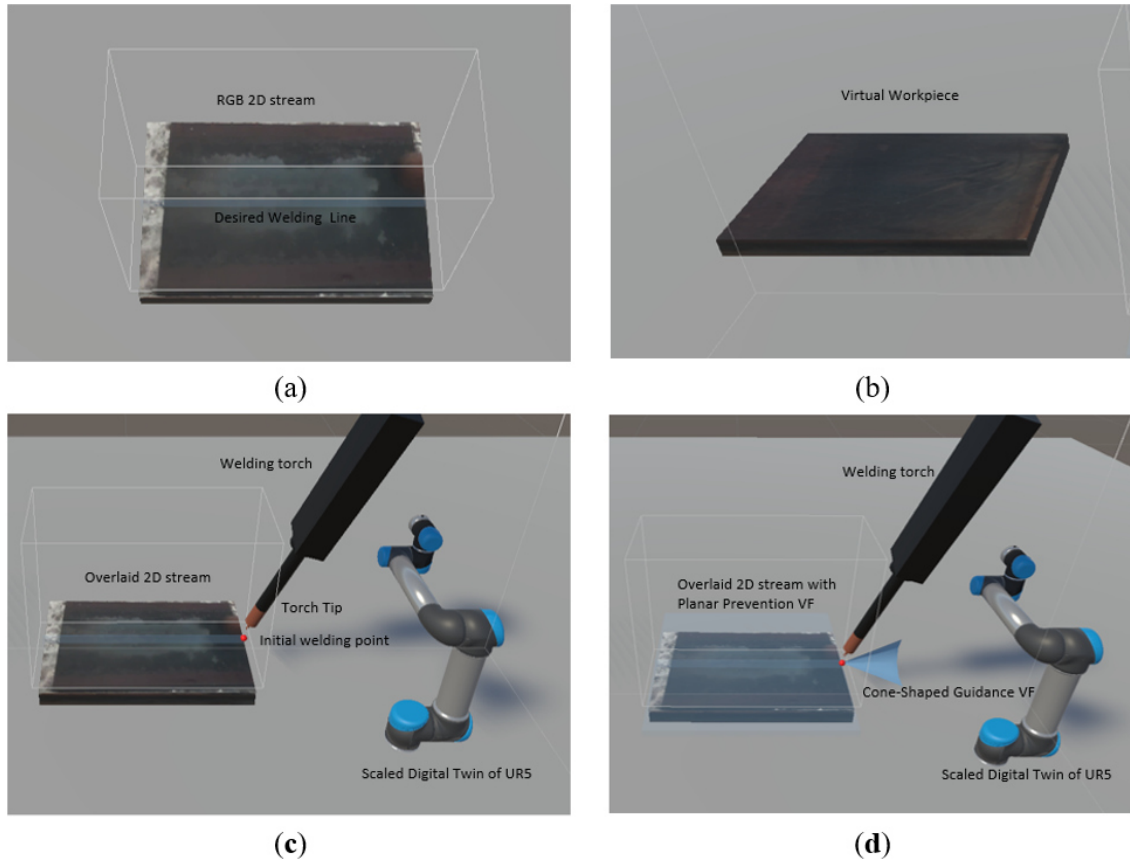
The visualization of tele-welding interaction modules used in the tele-welding experiments. (a) Typical 2D visual feedback for remote-controlled robotic welding where the user uses a monitor to observe the welding process, without the immersive HMD usage; (b) the virtual replica of the physical welding workpiece; (c) tele-welding MR platform without haptic effects including welding virtual workpiece, overlaid RGB stream, virtual welding torch, and the scaled digital twin of UR5; (d) the MRVF module involving hybrid guidance and prevention VFs.
